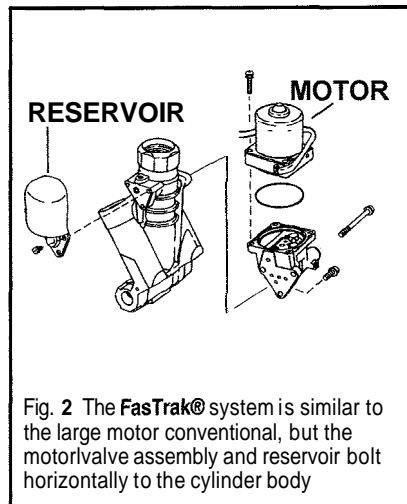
The FasTrak® system is similar to the large motor conventional, but the motor/valve assembly and reservoir bolt horizontally to the cylinder body
